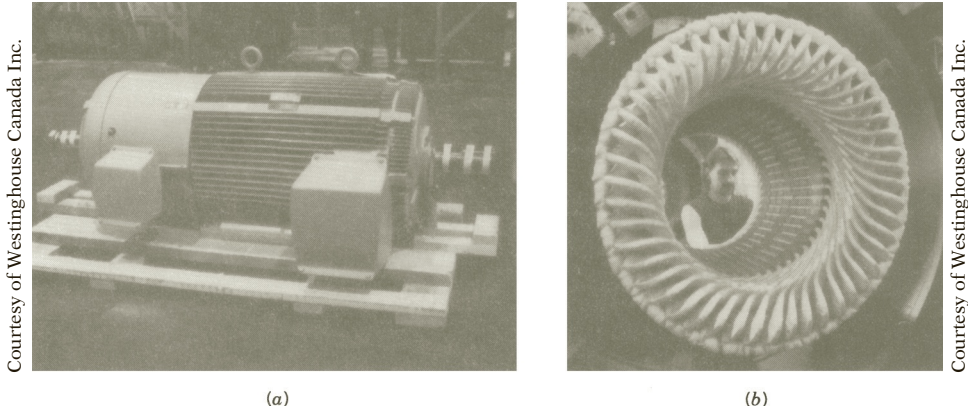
Three-phase induction machine. (a) Induction machine with enclosure. (b) Stator with three-phase winding.
